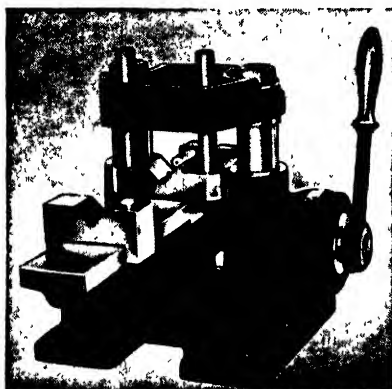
Flanging a Vee Belt Sheave Groove.
